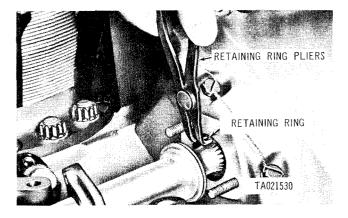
Removing or installing horizontal fan drive shaft retaining ring using ring pliers.
